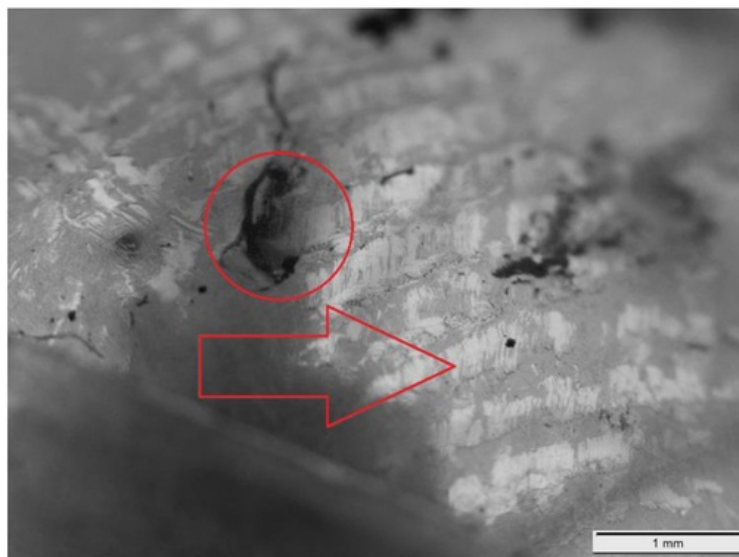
Bearing 6.2 ball scratches (arrow) and surface contamination (red circle)
